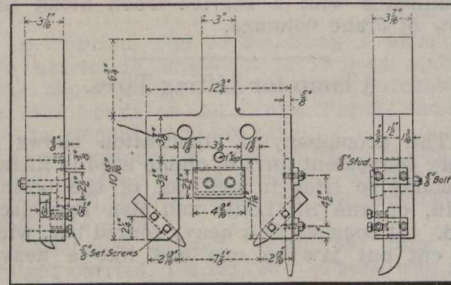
Gang Tool for Planing Shoes and Wedges.
